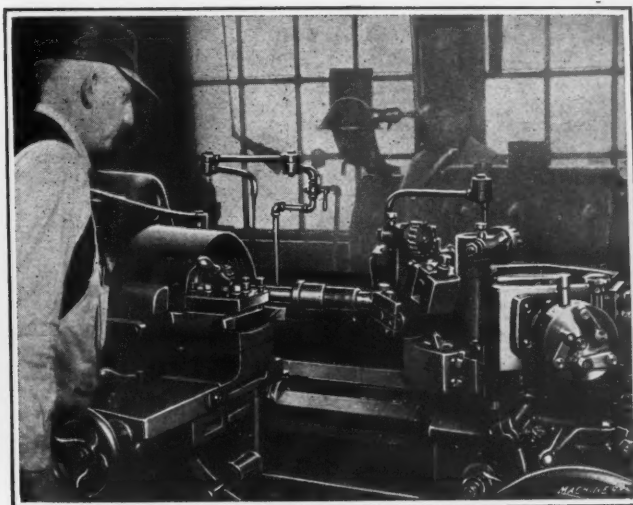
Illustration showing Machine engaged in turning a Part from Bar Stock
